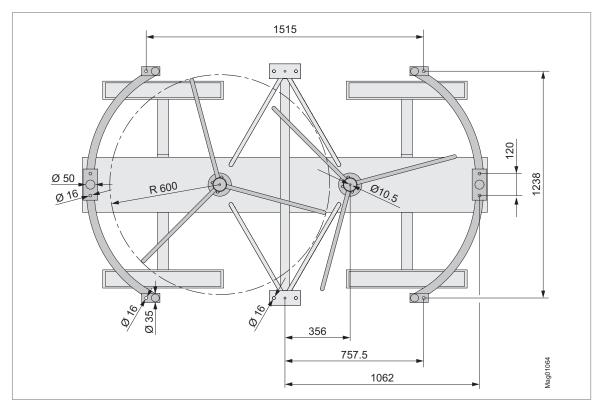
Dimensions MPT-353 – view from below (dimensions in mm), illumination optional
